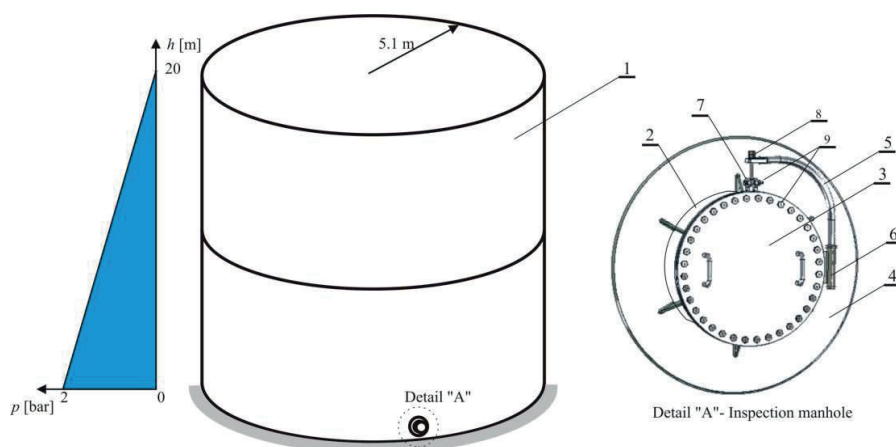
Tank to be analysed and inspection manhole to be inserted.
